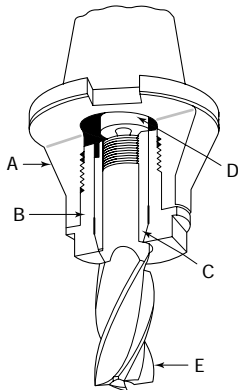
Collet chuck for screwed-shank solid end mills: A – main body of collet chuck; the locking sleeve B positions the collet C and mates with the taper nose of the collet to close the collet on the cutter shank; the collet is internally threaded to prevent the cutter E being drawn out of the chuck whilst cutting; the male centre D anchors the shank end of the cutter and ensures true running
